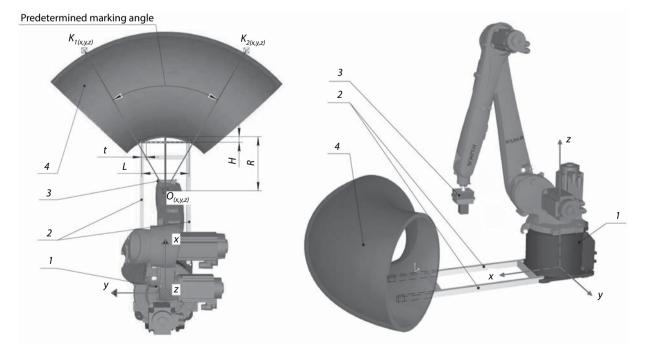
The scheme for calculation of marking points: 1 – manipulating robot; 2 – setting parallel rods; 3 – measuring and marking device; 4 – marking bend billet
